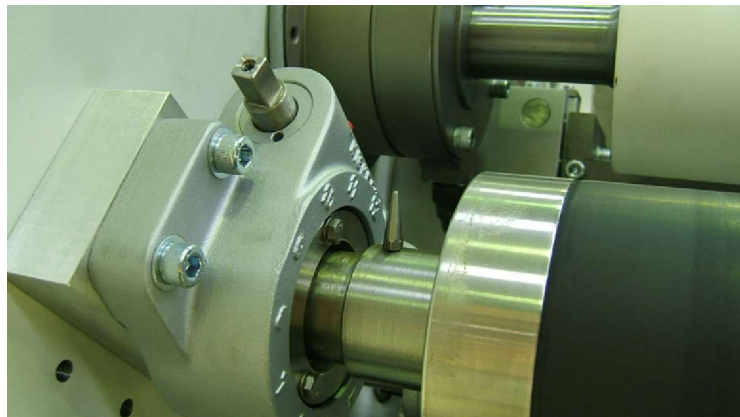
2 Photograph Showing Kickert Spreader Roller Apex Indicator
